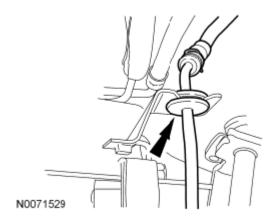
Locating Hydraulic Clutch Line And Grommet Courtesy of FORD MOTOR CO.
